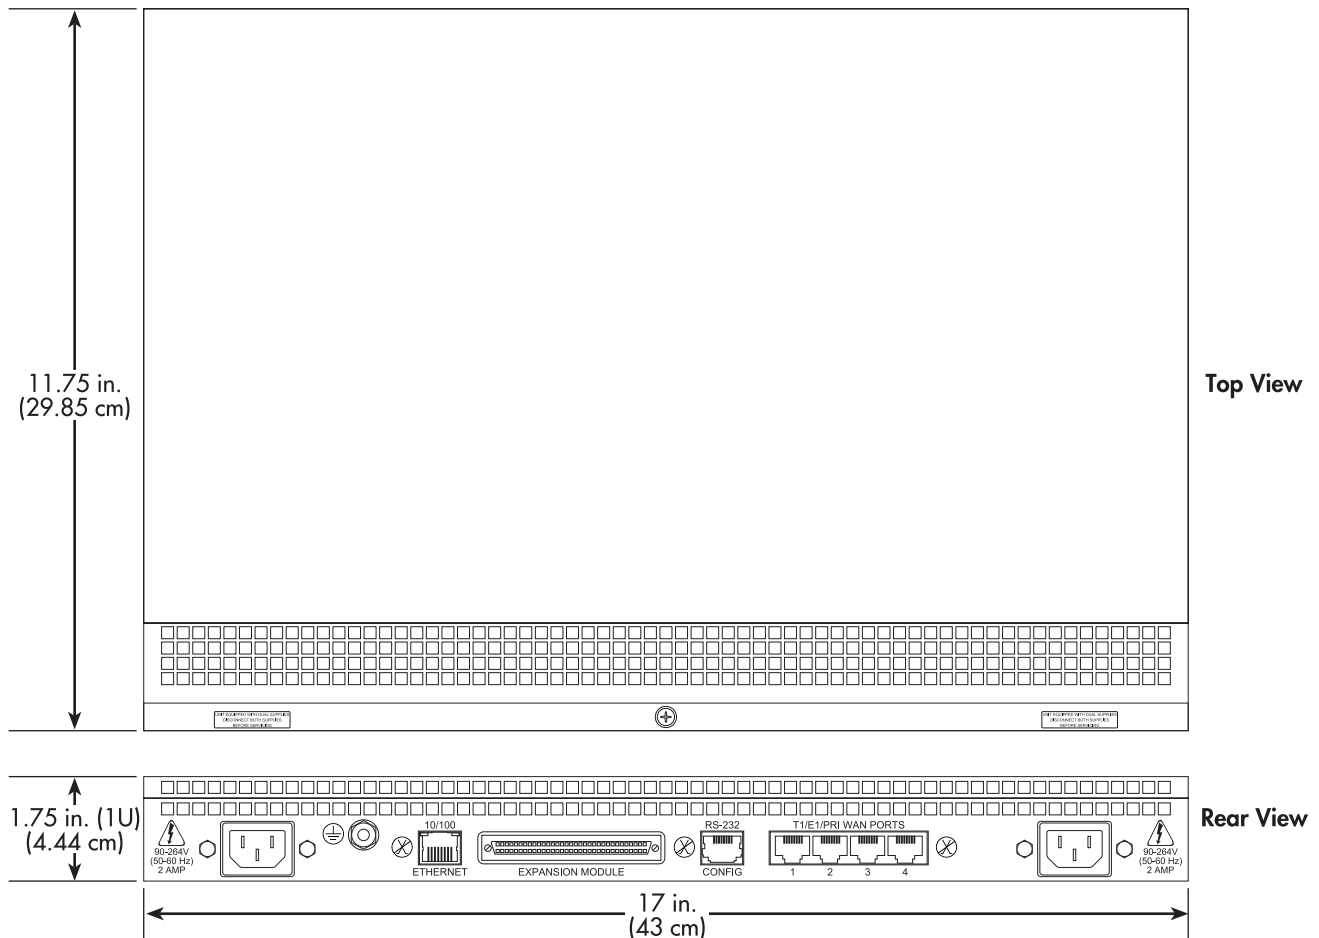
Model 2960/2996 RAS chassis physical dimensions
